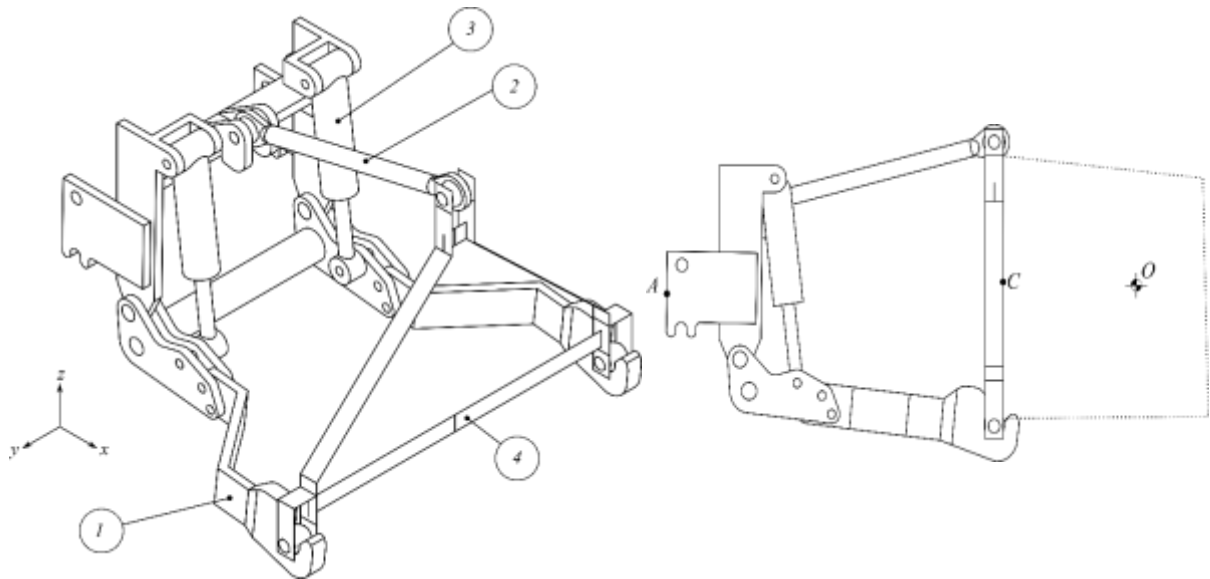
Front three-point linkage and substructure model of the front mounted machine.
